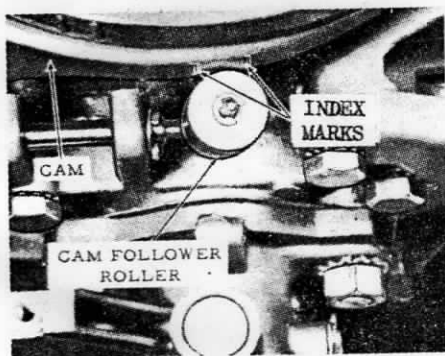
View of the cam follower centered between index marks on speed control cam. Cam attaching screws are on under side.
